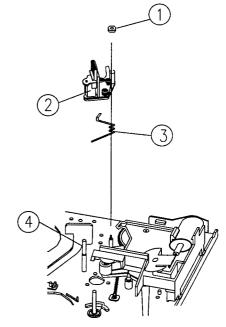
DISASSEMBLY OF THE AC HEAD ASS'Y
